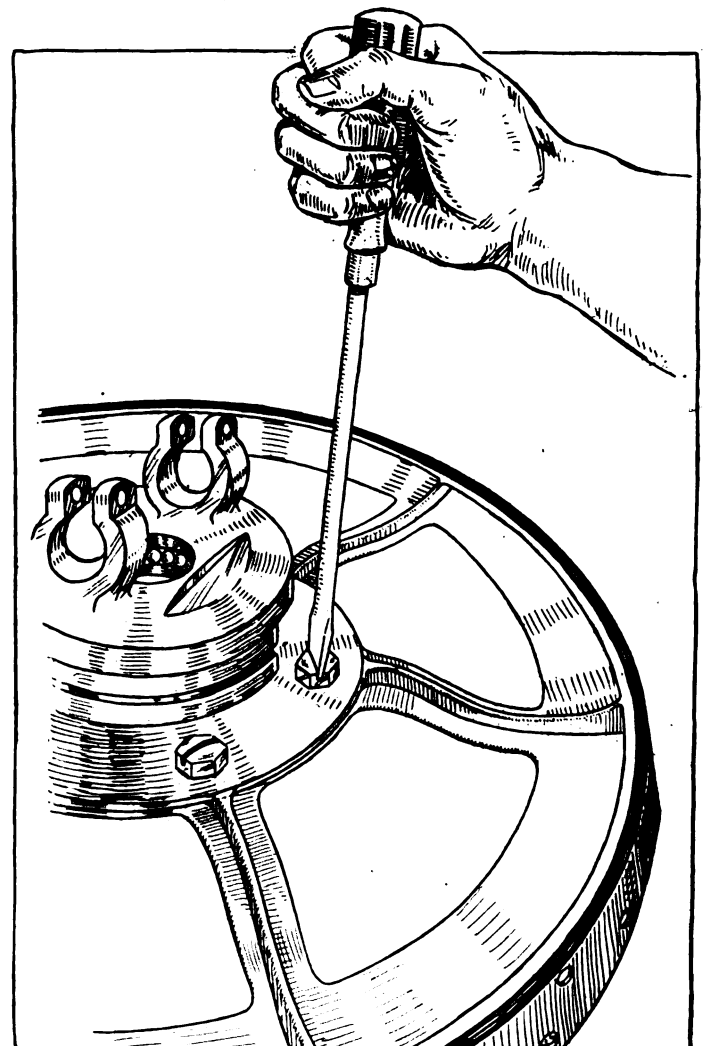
Removing screw to get at the spring of the clutch used on E-M-F
